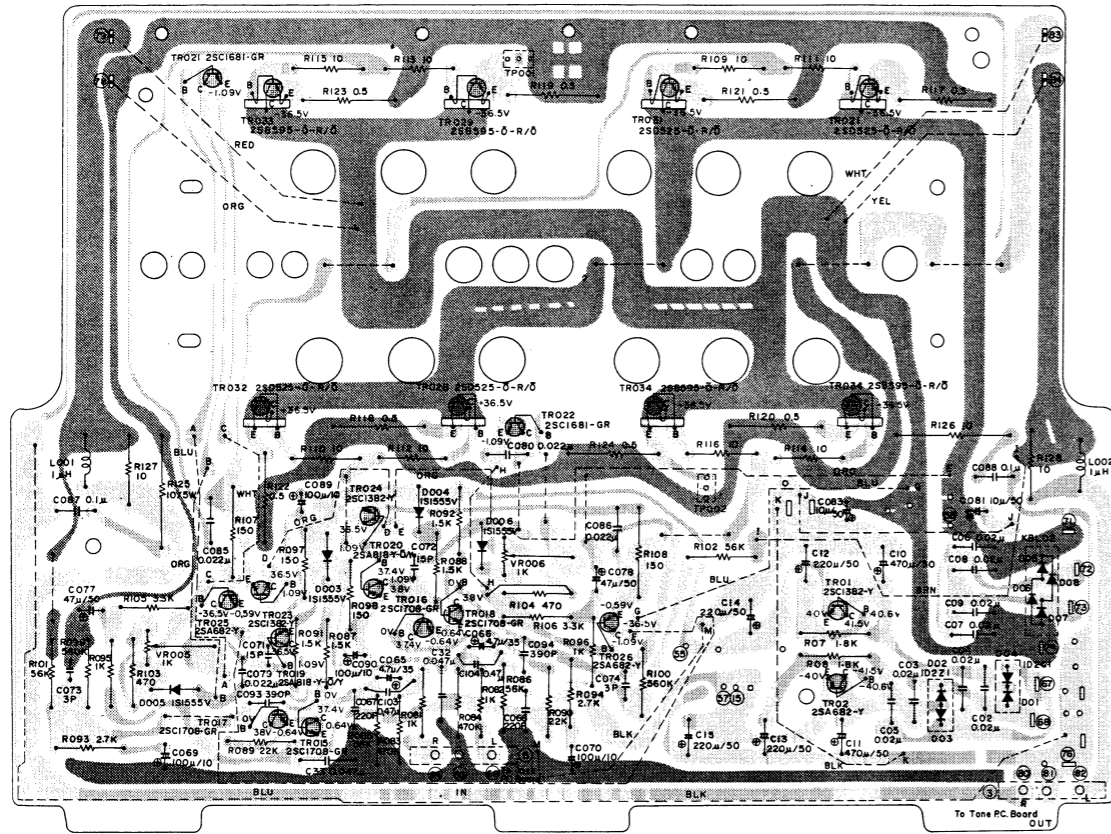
Bottom View of Power Amp. P.C. Board (CCT-PA-C16).
